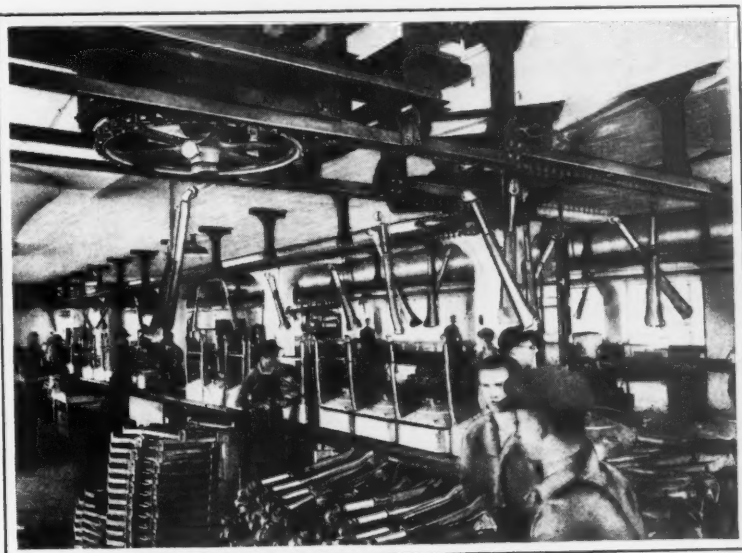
Gravity Roll Conveyor and Overhead Carrousel Conveyor Used in Assembling Operations
